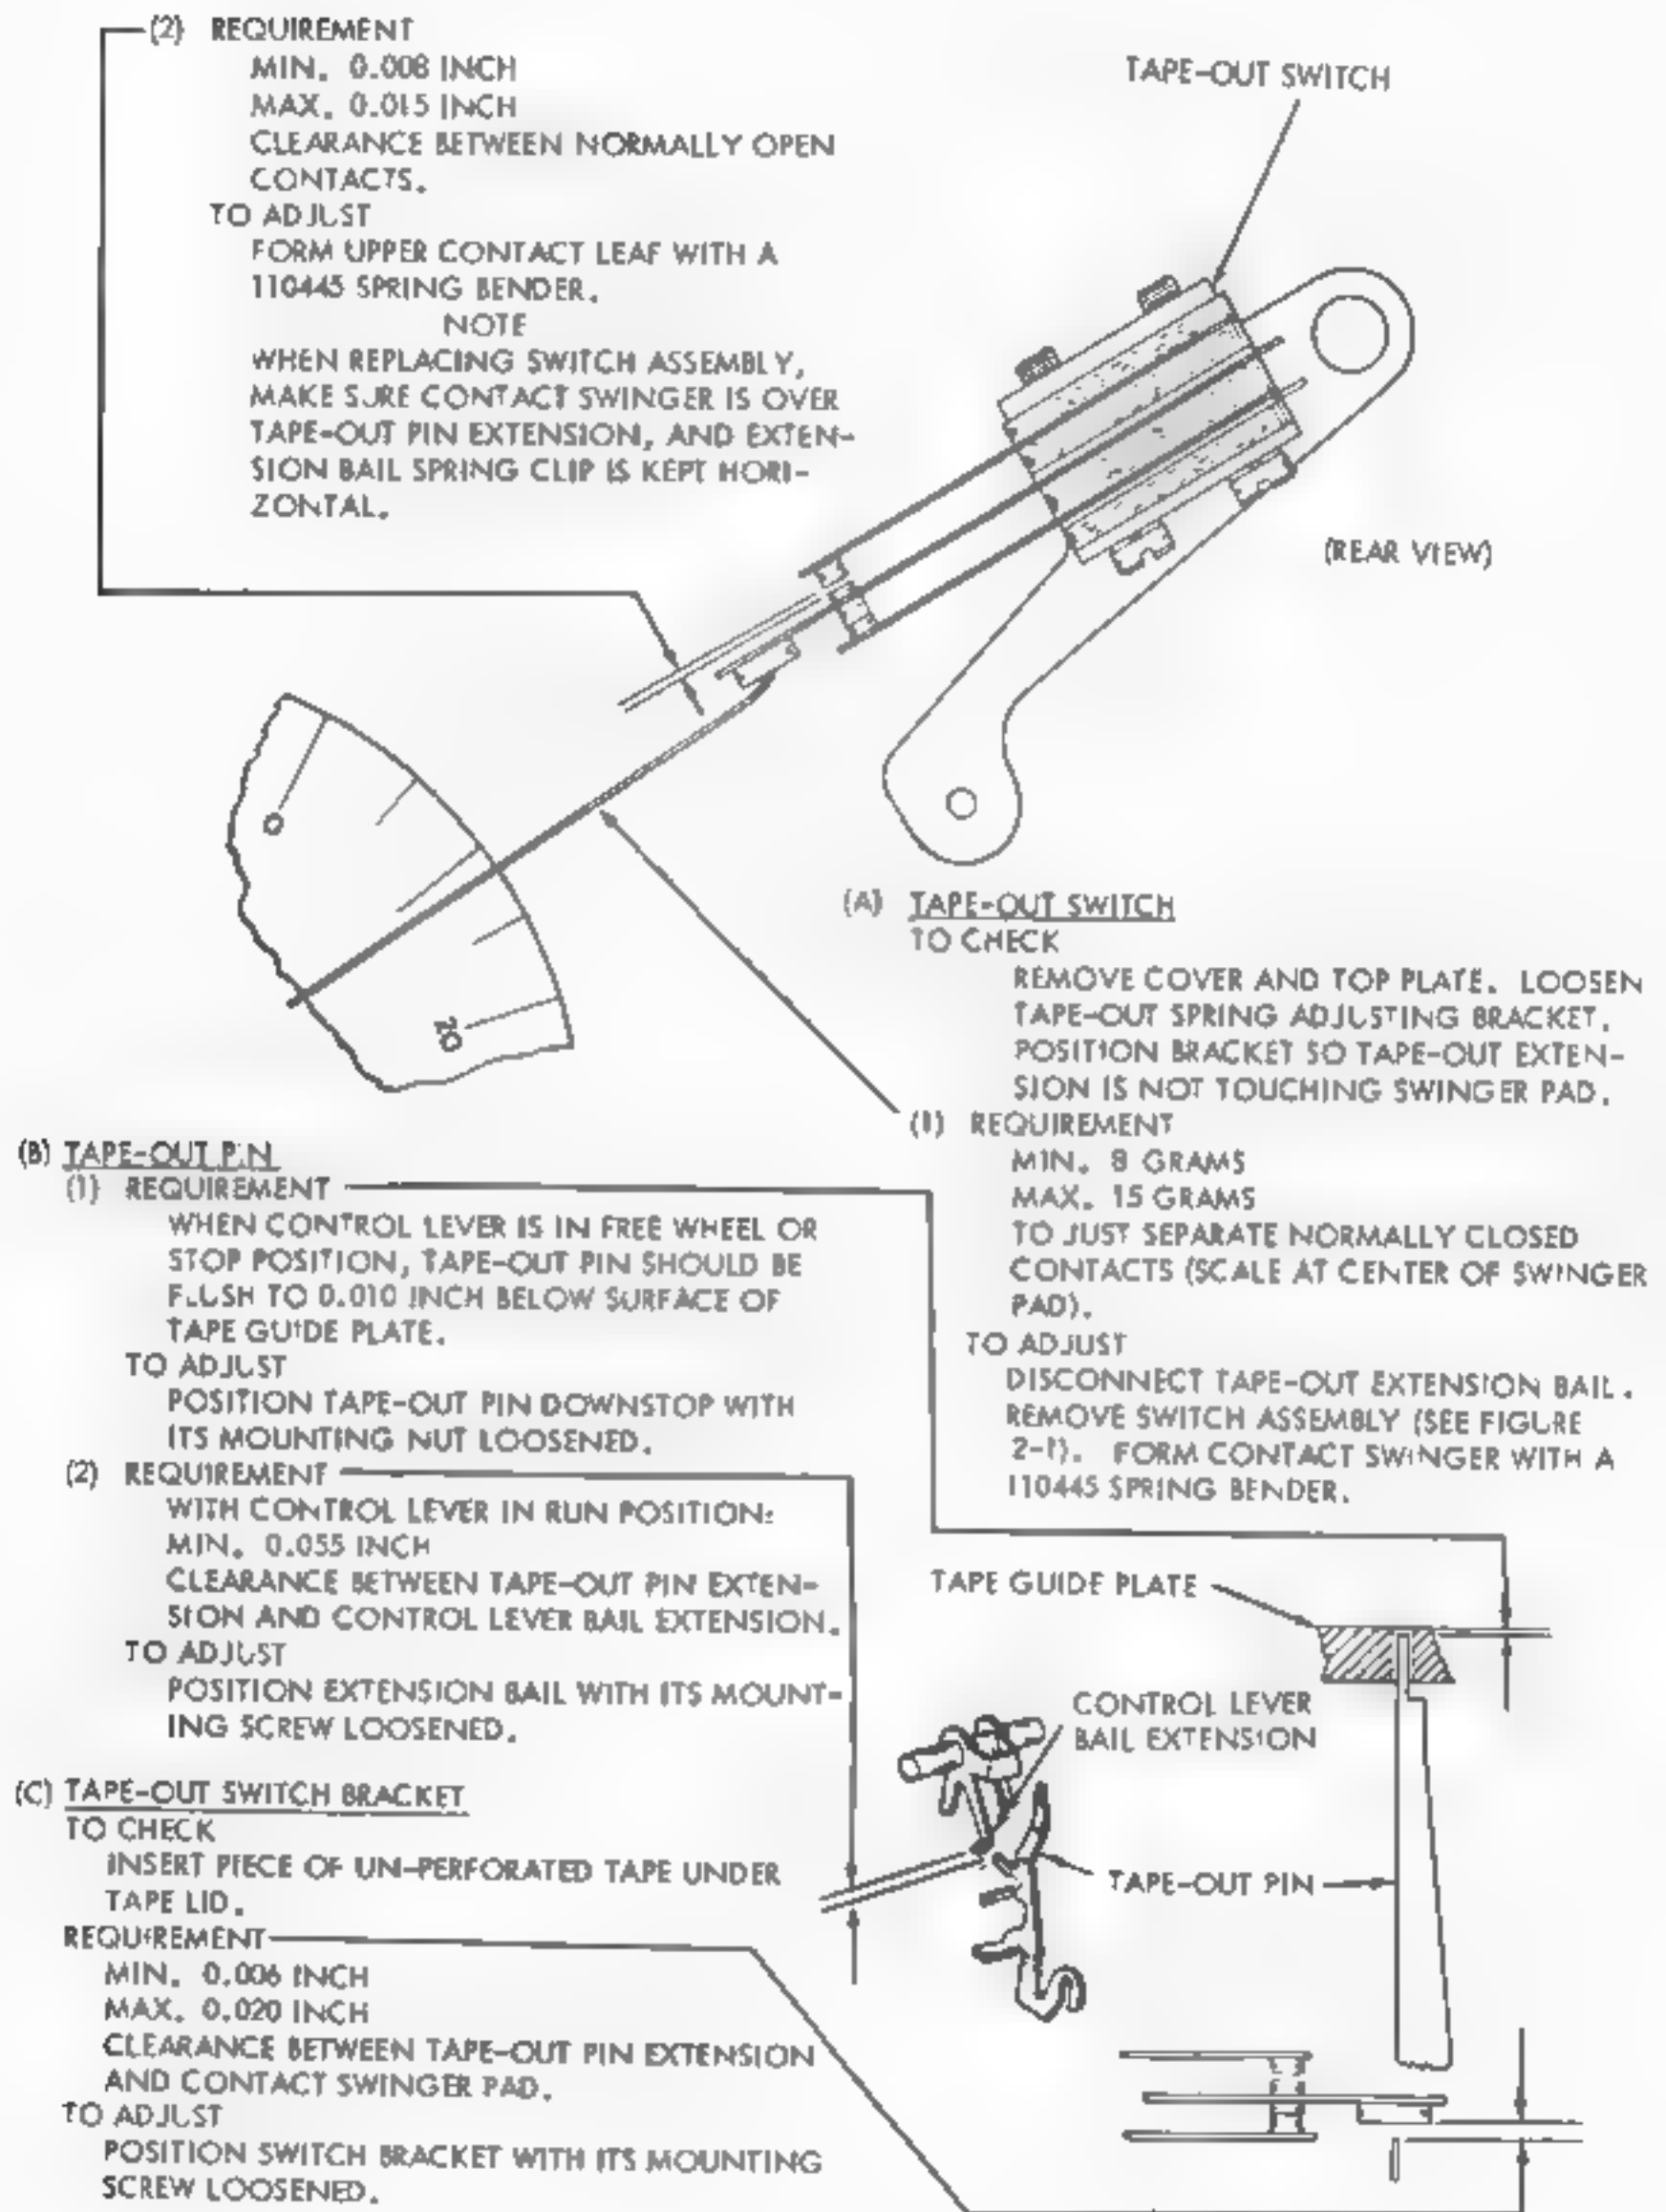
TAPE-OUT SWITCH ASSEMBLY
